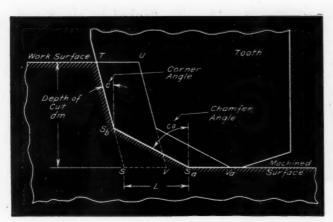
Contact Points when the Cutting Edge of the Tool is Chamfered
